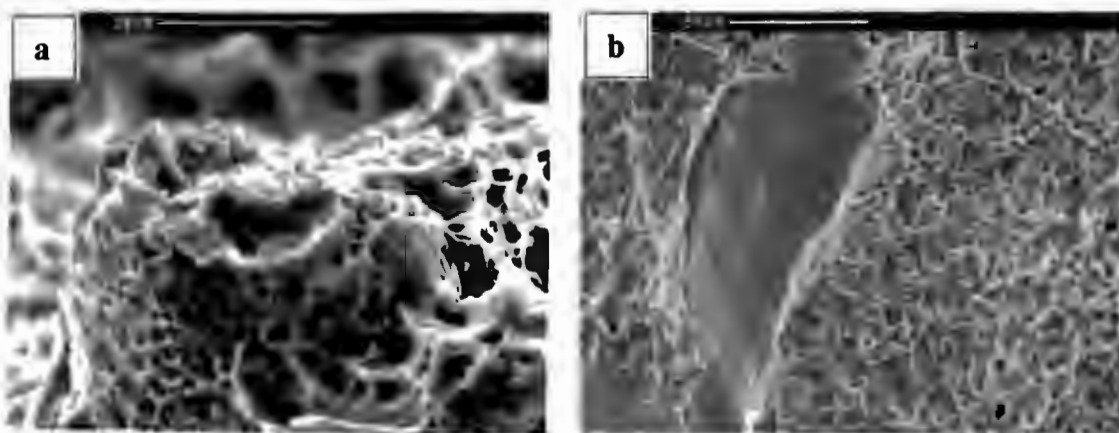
Ductile fracture surfaces of tensile test at 20°C of:
